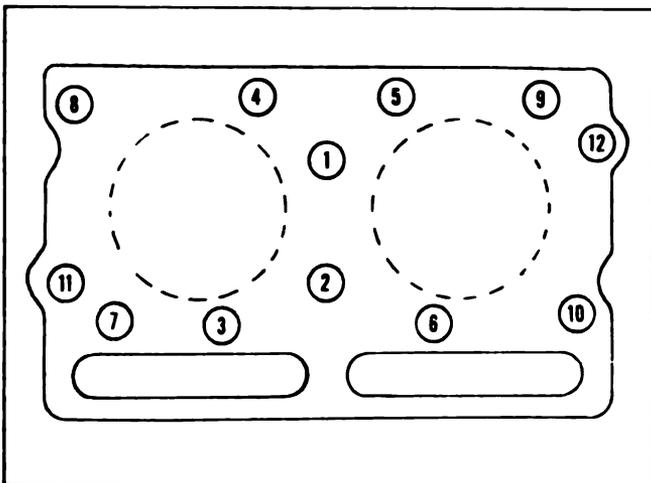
(N11427). The Tightening Sequence For The Cylinder Head Capscrews.
